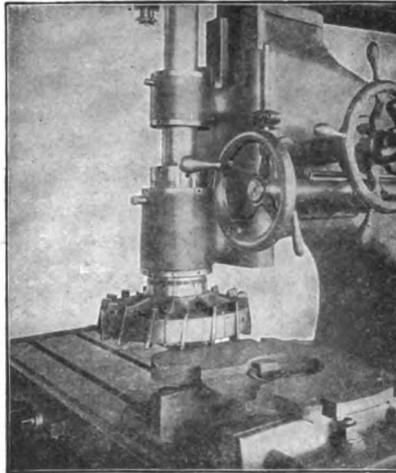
Facing a Plane Surface with Inserted-Tooth Tool.
